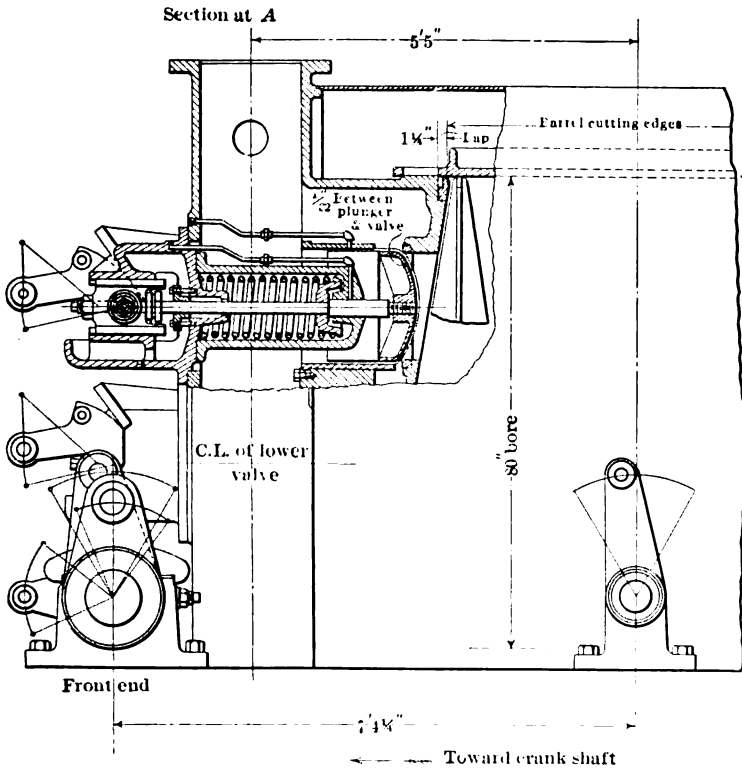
BLOWING TUB WITH MOVABLE CYLINDER (SLICK DESIGN) BUILT BY ALLIS COMPANY
